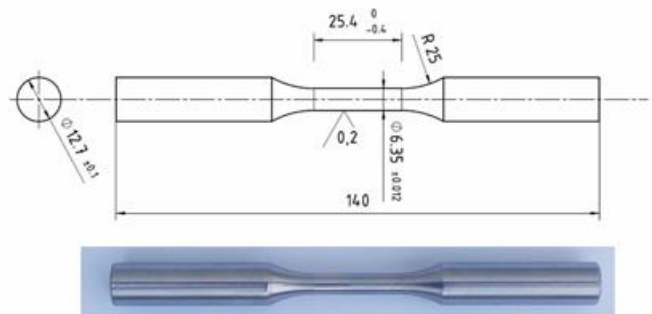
Technical drawing of fatigue testing specimen and real specimen (unit: mm)
